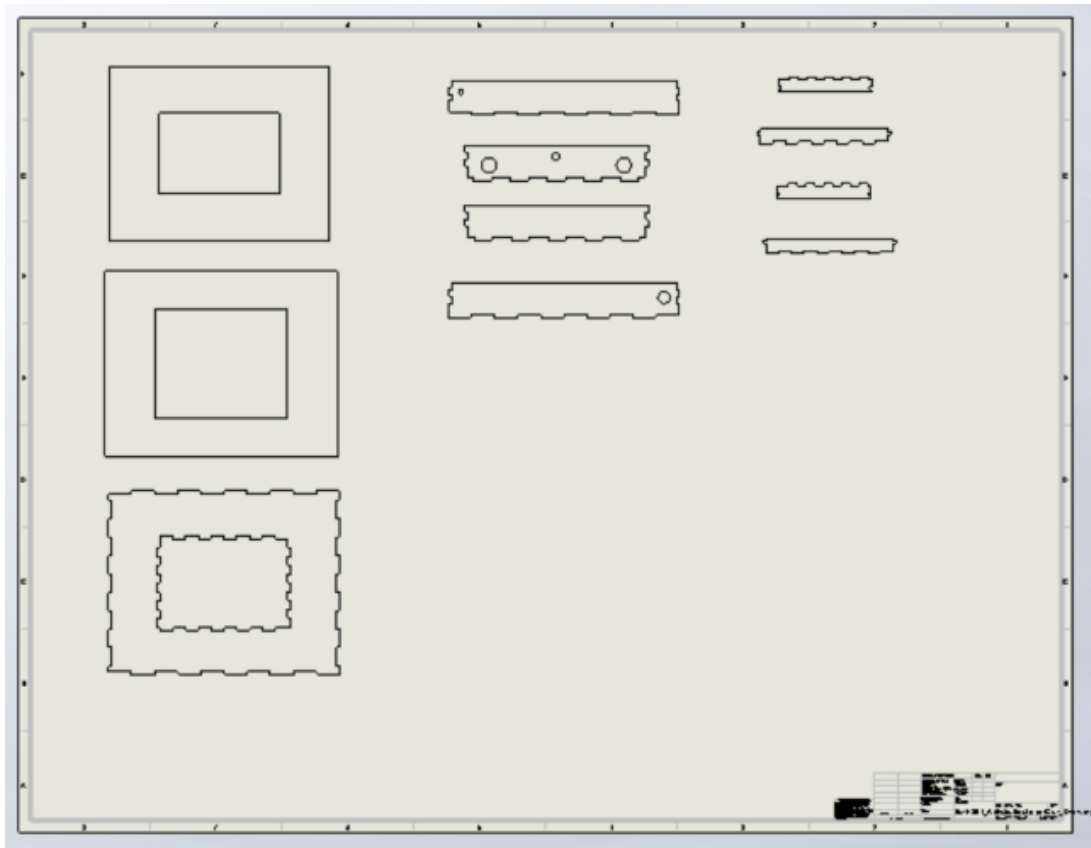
SOLIDWORKS drawing ready to be cut by the laser cutter with acrylic.
